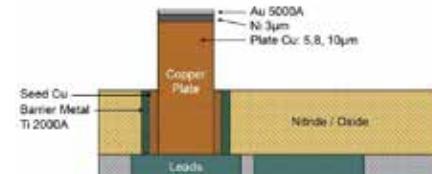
Advanced packaging techniques use complex structures to route signals between the chip and the package, allowing more connections in less space. The structures are typically created with wafer-level processing using processes similar to front-end fabrication processes.
